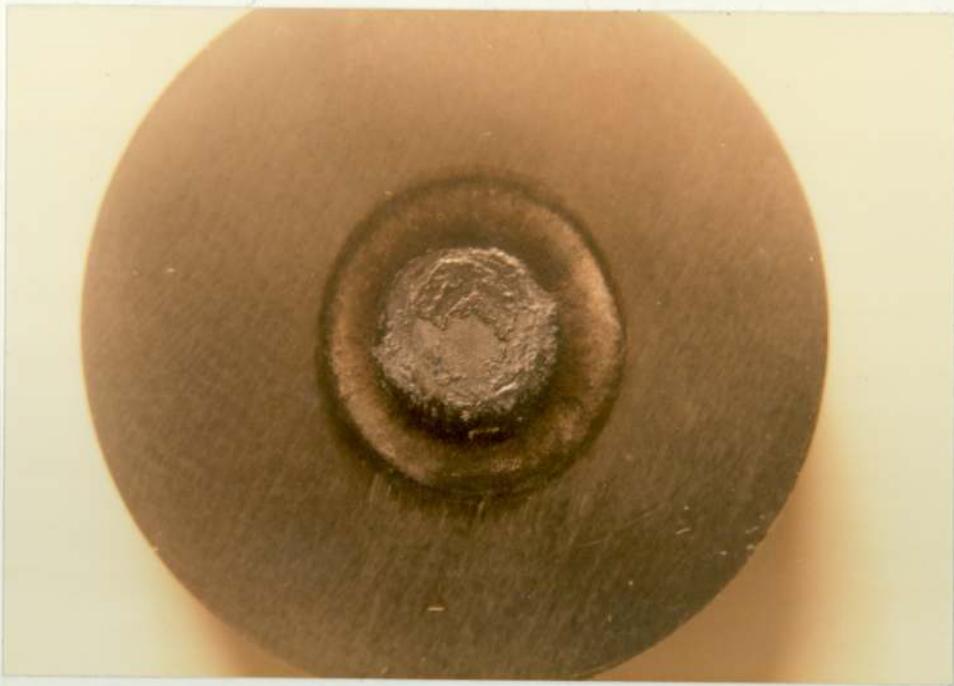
Undescaled TiN coated flat die after forging 200 billets showing the wear ring and the central plateau.
